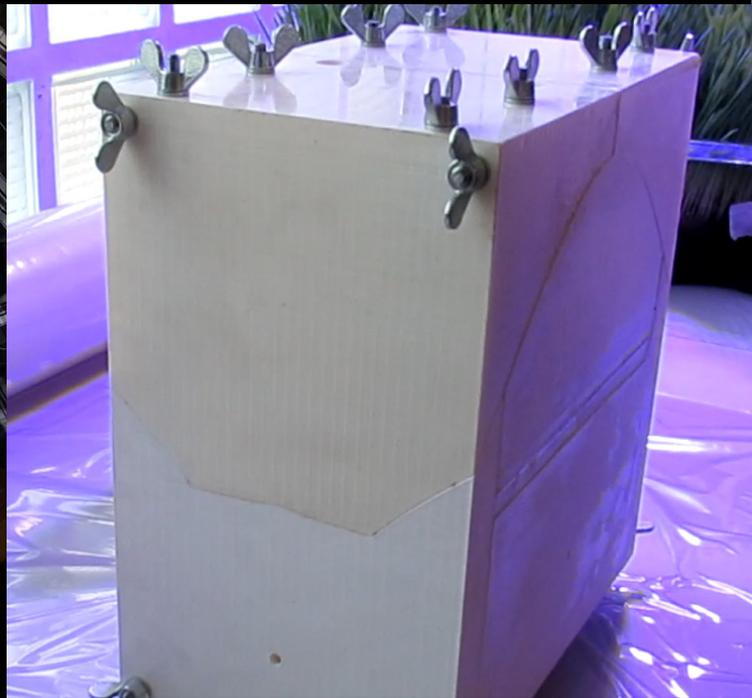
Applying vaseline to the sides of the mold aids in closing the mold parts onto each other.
